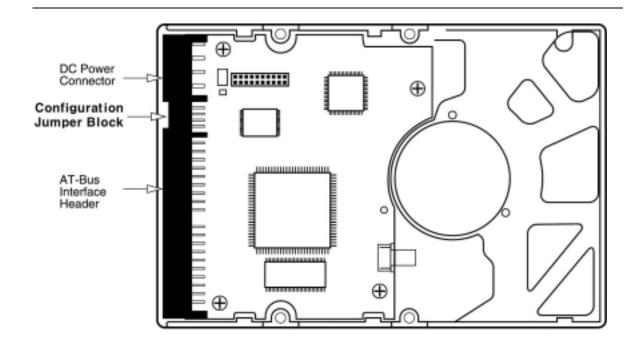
Jumper Pin Locations on the Drive PCBA
